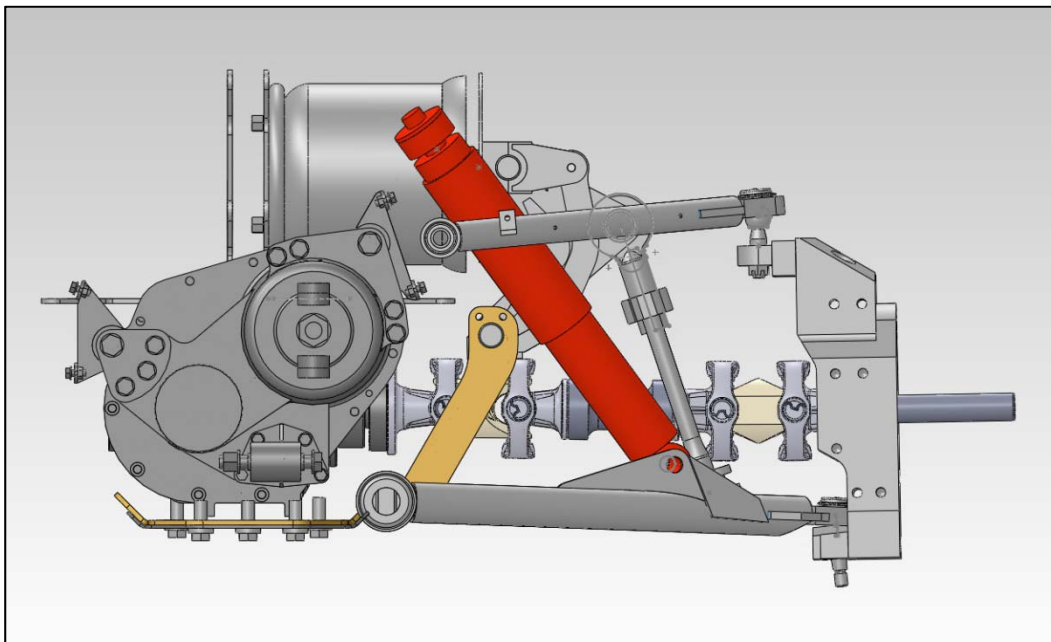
Side View (Off-Road Height, 0° Steering Angle)
